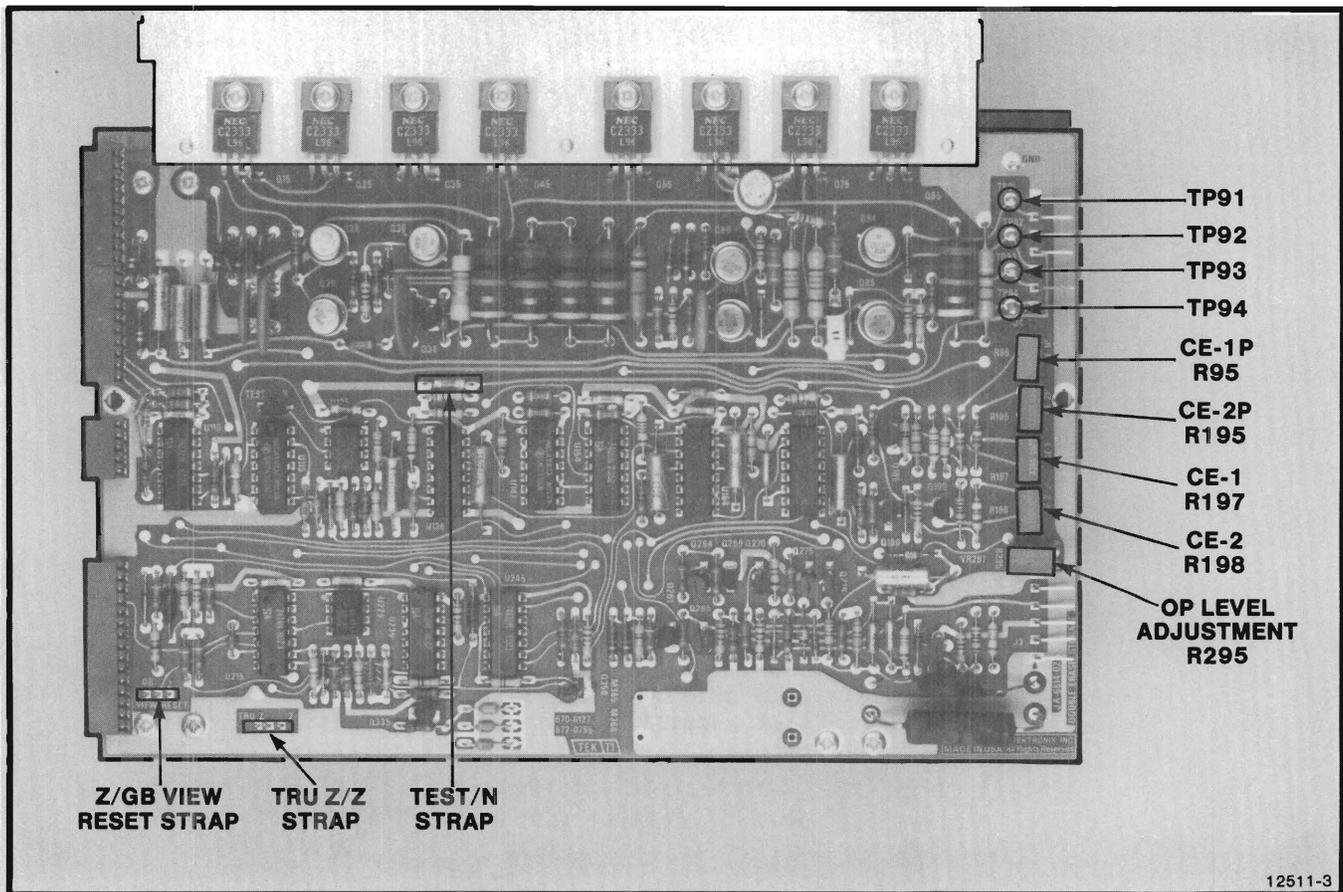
Storage Board Adjustments, Straps and Test Points.
